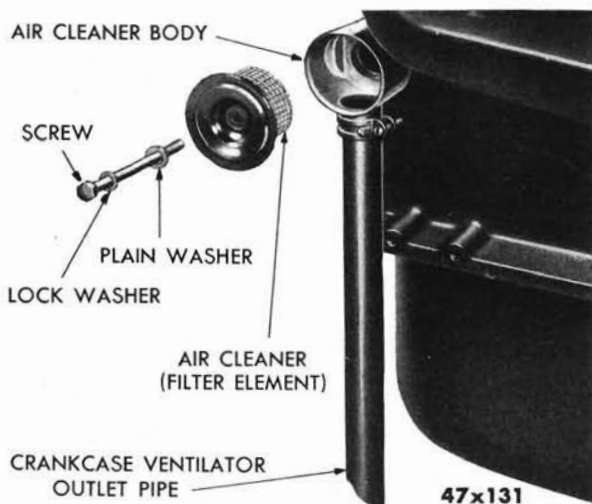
Crankcase Ventilator Outlet Pipe Air Cleaner
